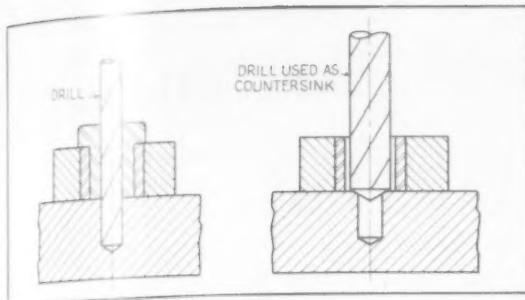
When accuracy is demanded, the drill, when used for countersinking, must be guide-located.
